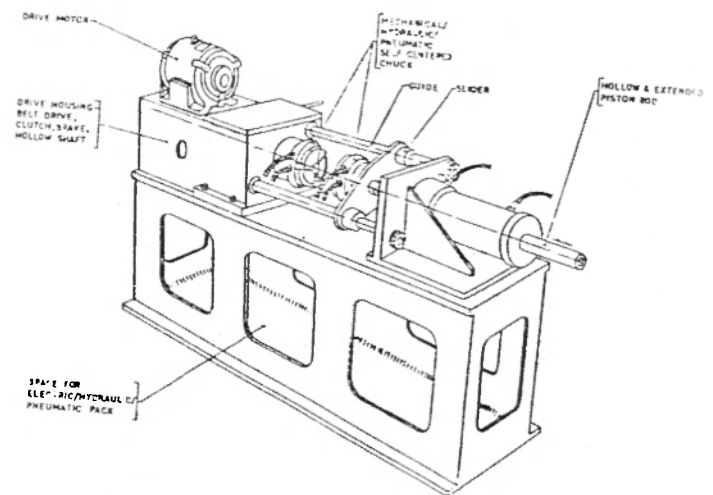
Continuous drive friction welding machine -- Schematic
